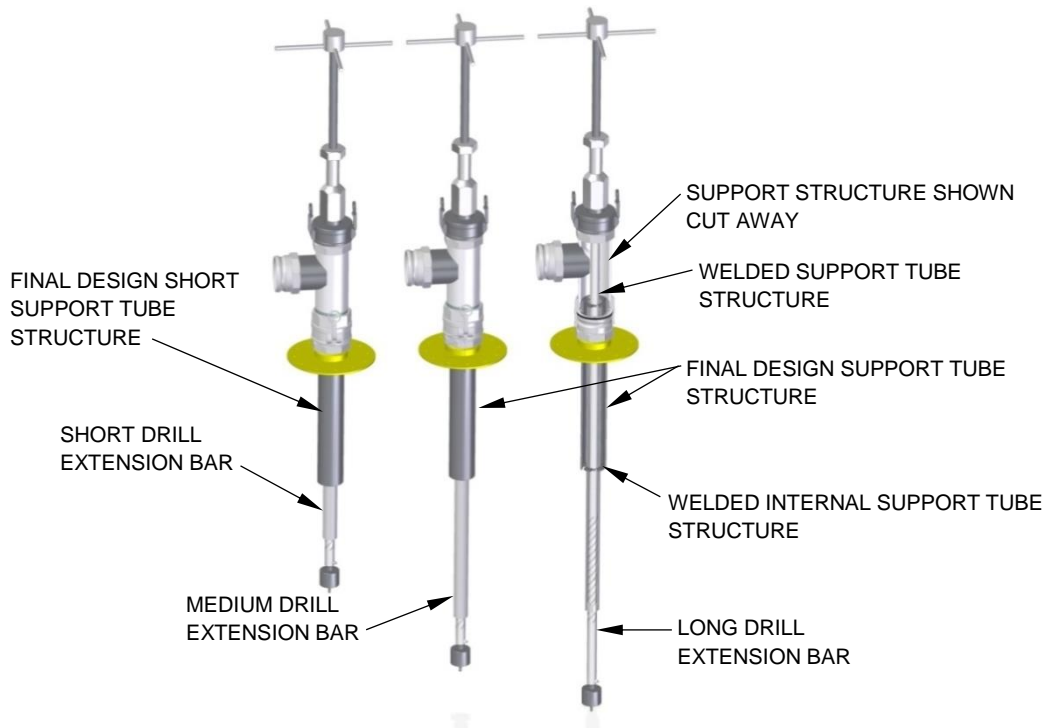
Three Different Lengths of the Final Design Hot Tap Extension Tools
